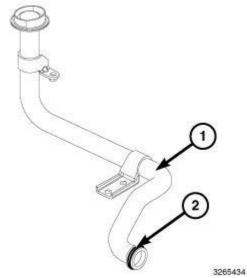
Oil Pump Pickup Tube & O-Ring Courtesy of CHRYSLER GROUP, LLC
